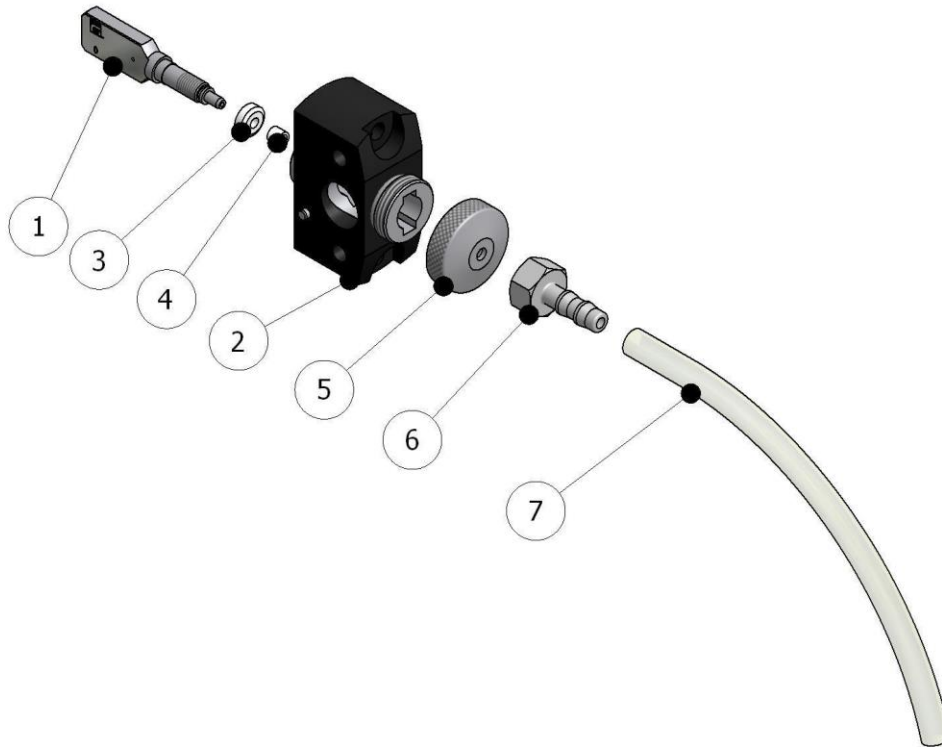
(OPTIONAL) Pour Adapter, Exploded View
